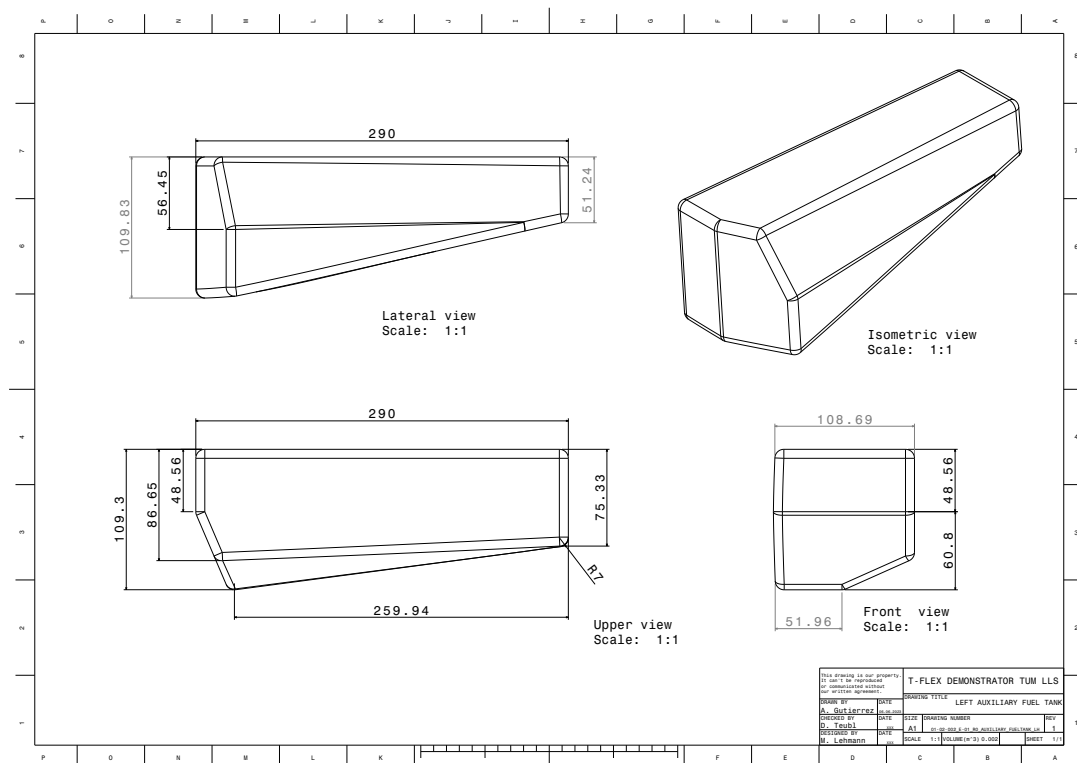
Technical drawing of one of the auxiliary Fuel Tank
